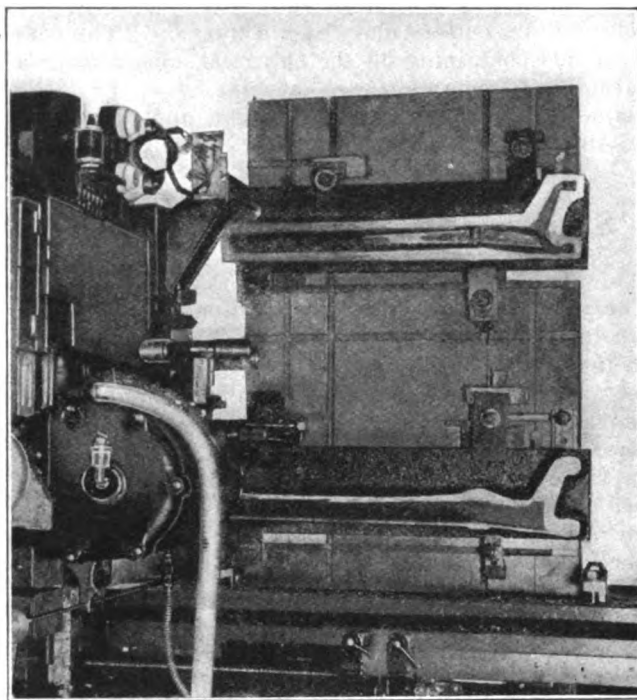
WORK AND MASTER ON KELLER TYPE F MACHINE
